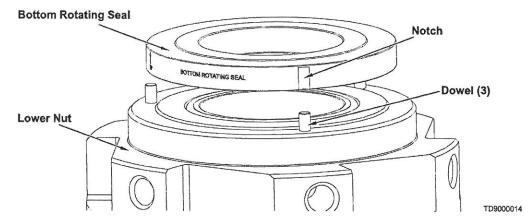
Installing the Bottom Rotating Seal on the Lower Nut
